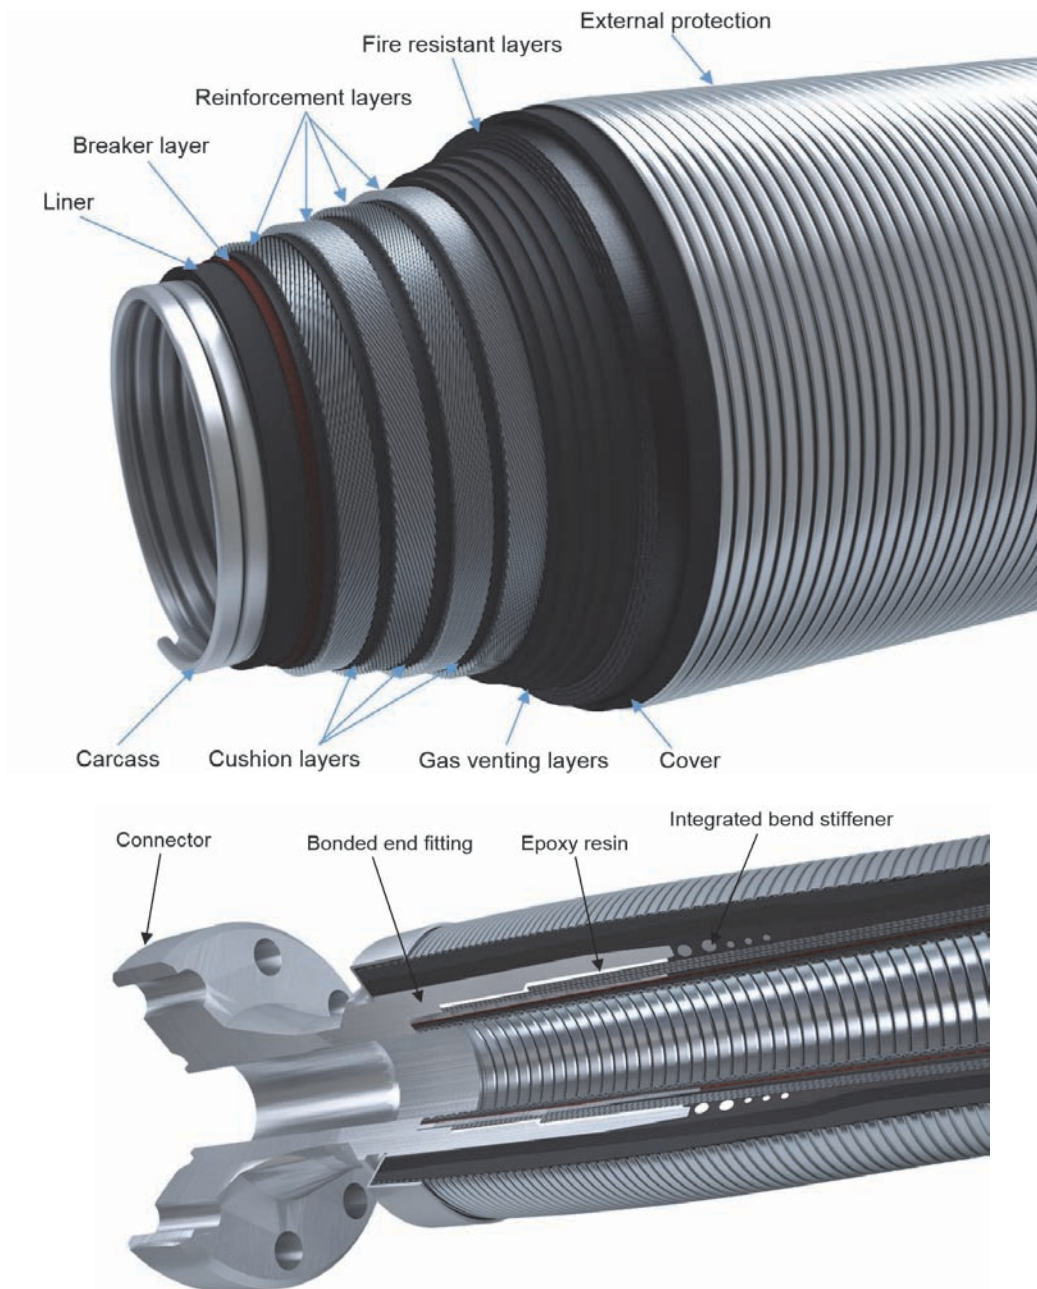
Typical Bonded Flexible Pipe—Flowline and Riser
